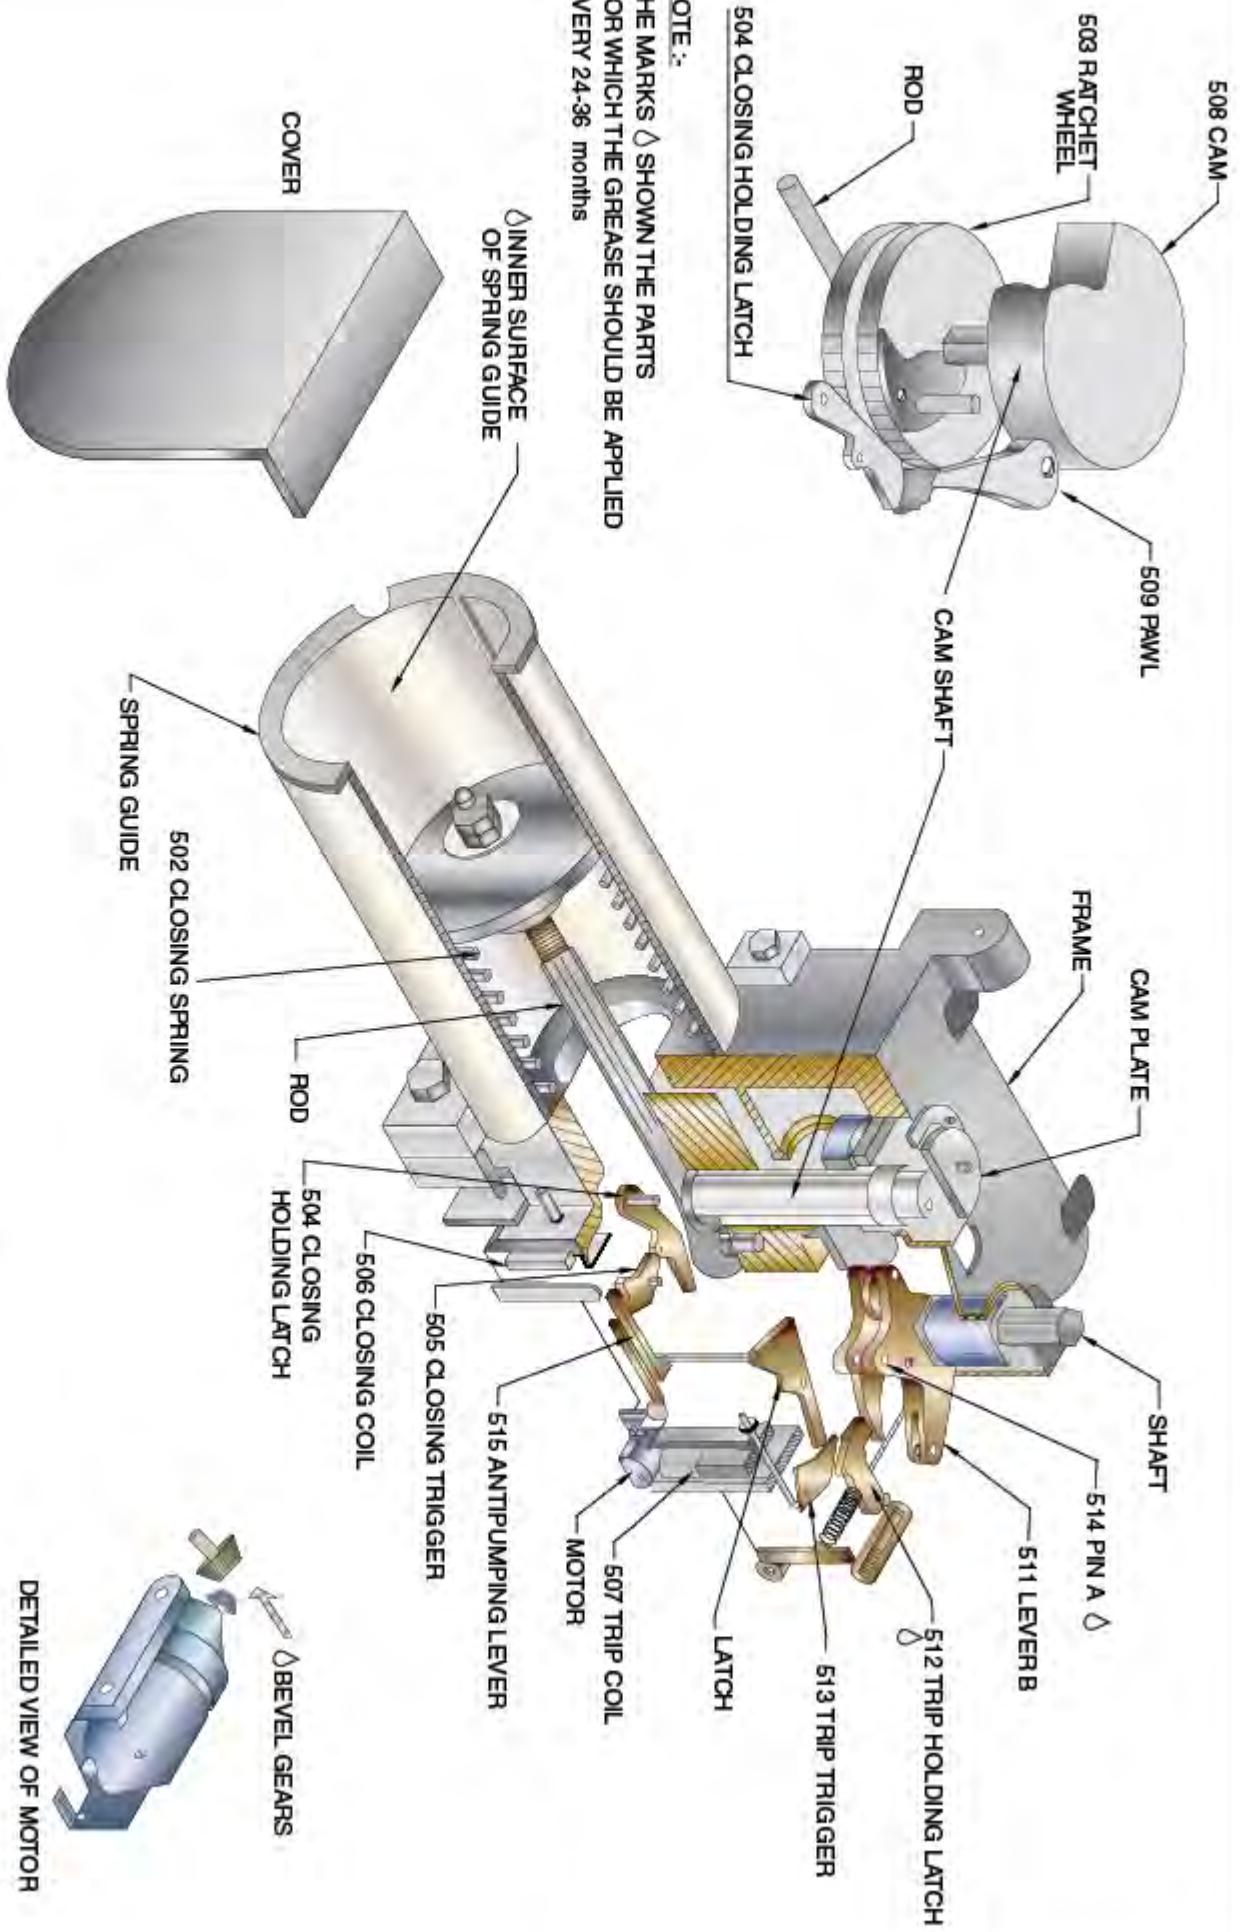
SOLID CROSS-SECTIONAL VIEW OF TYPE BM SPRING OPERATING MECHANISM
